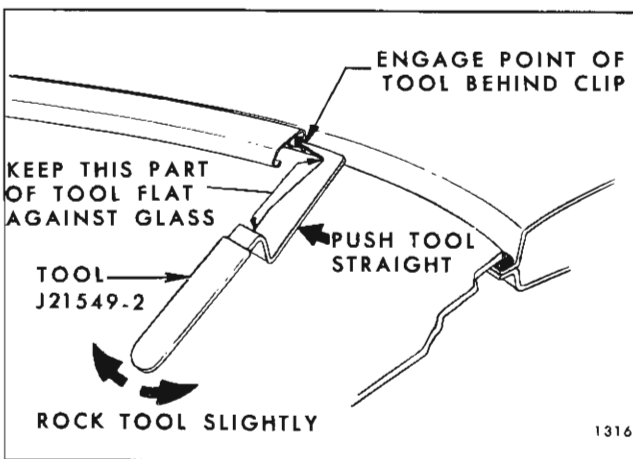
C4—Reveal Molding Clip Disengaging Tool
